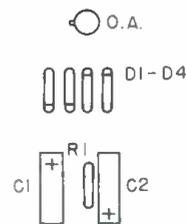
The component side view of the board shown in Figure 2. Again, scale is full sized. Note: O. A.—Vactec VTL-2C2; D1 to D4—1N4001; C1—1 μ F-500 μ F (see text) 3V d.c.; C2—50 μ F 6 V d.c.; R1—1k.
